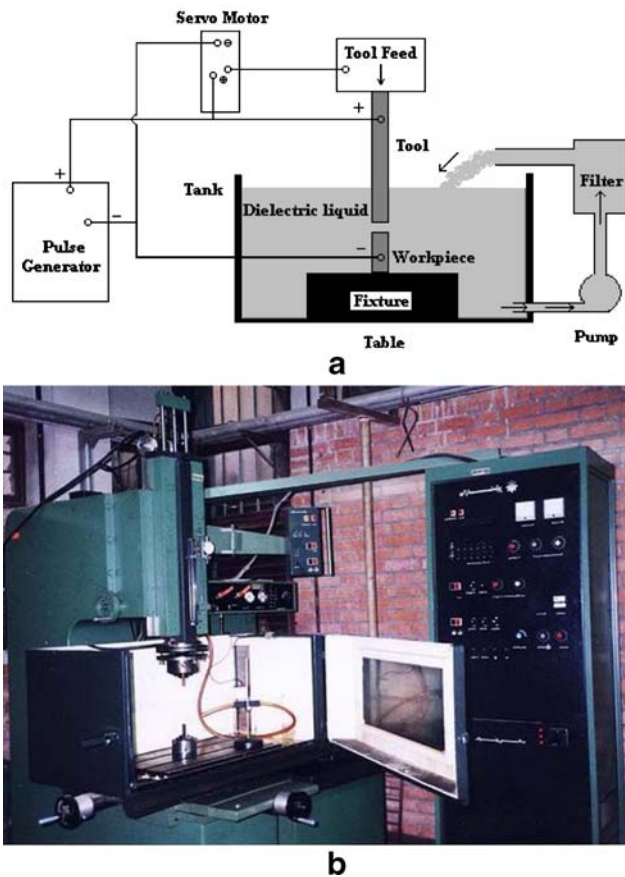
, b The experimental equipment. a Schematic drawing. b Photograph of the electro-discharge machining (EDM) machine
